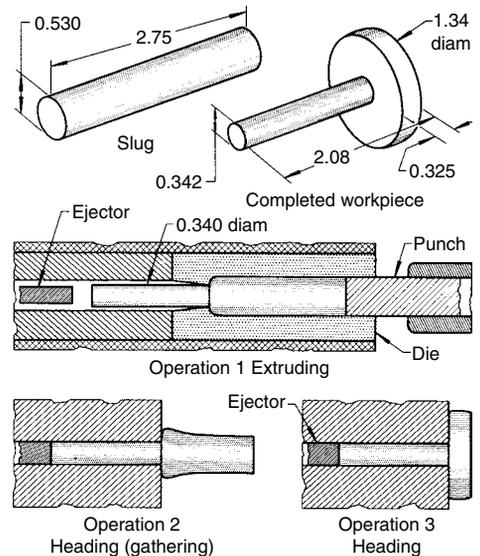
1018 steel adjusting-screw blank formed by forward extruding and severe cold heading. Dimensions given in inches
